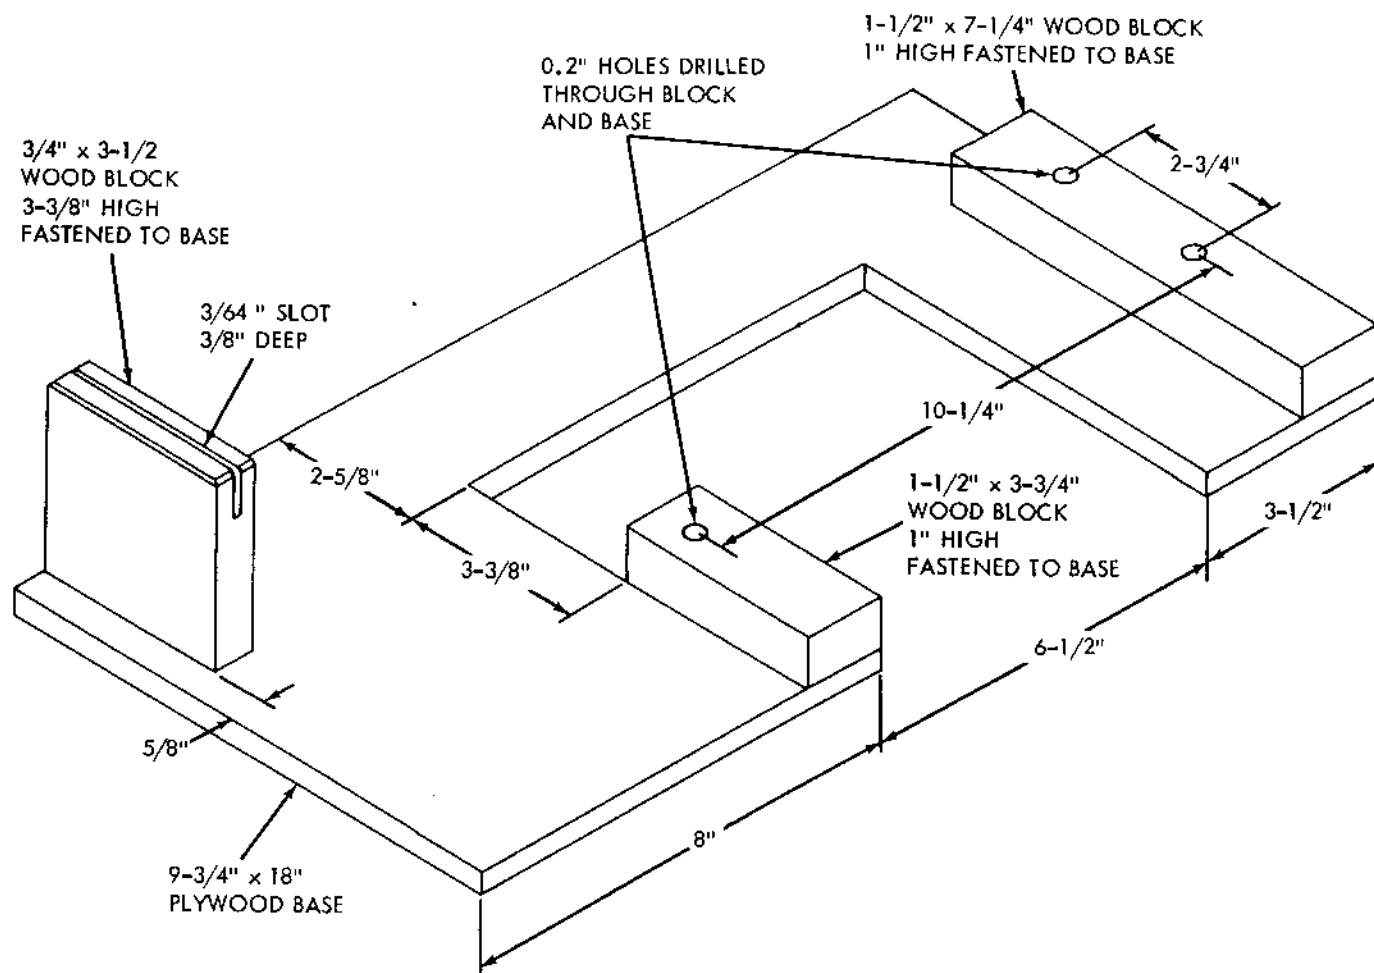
Projector Holding Fixture (Tool No. T-38001-A)
